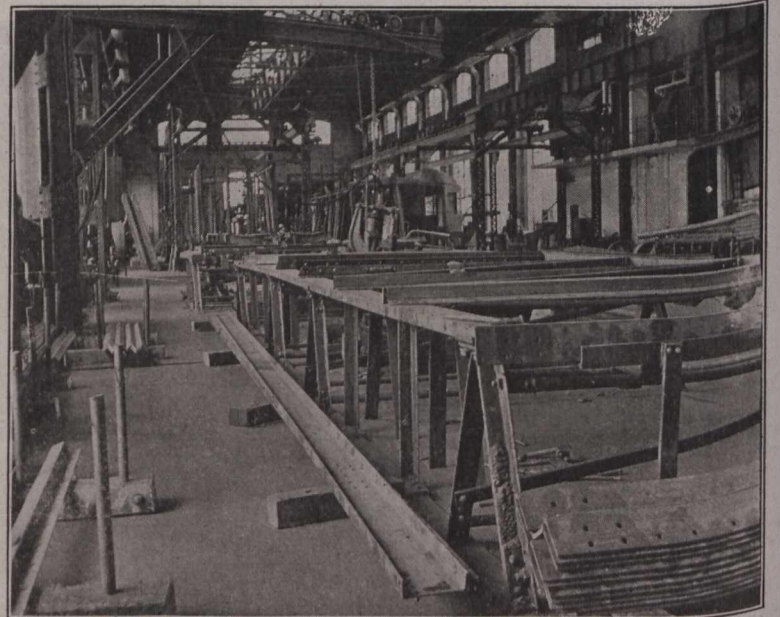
Assembling Steel Freight Car Side and End Frames.
